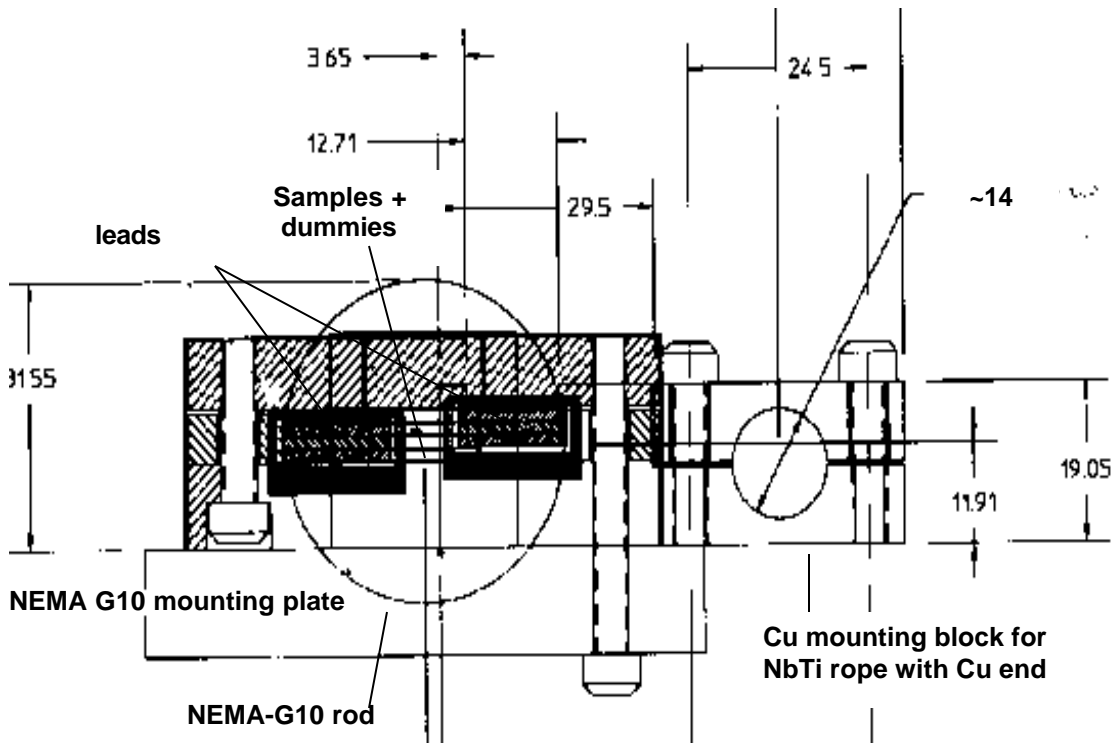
Top view of LBNL cable- I_c -sample holder for the NHMFL test-station, dim. in mm.
